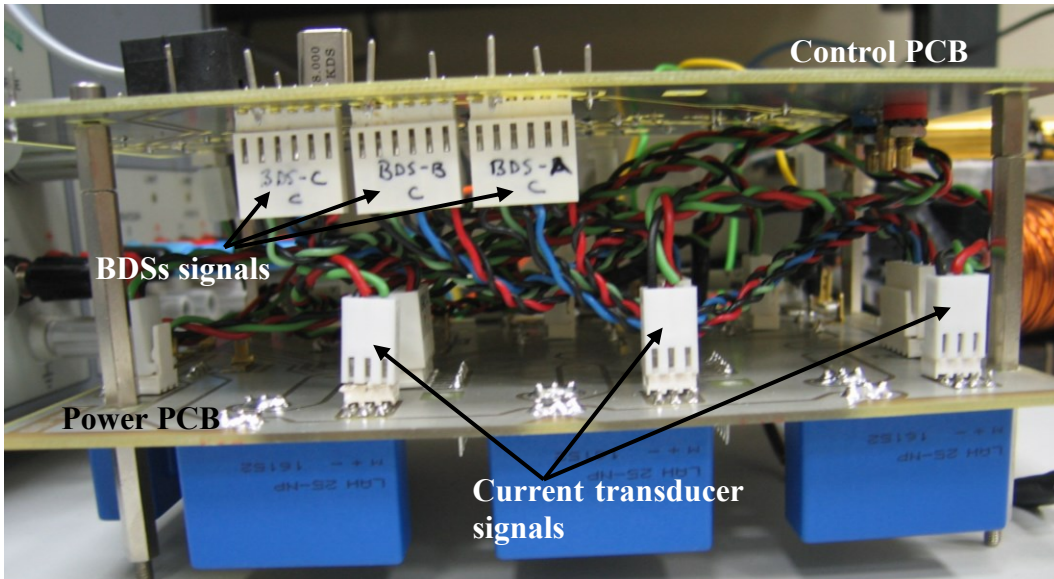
Mechanical and electrical assembly between the control and the power boards
